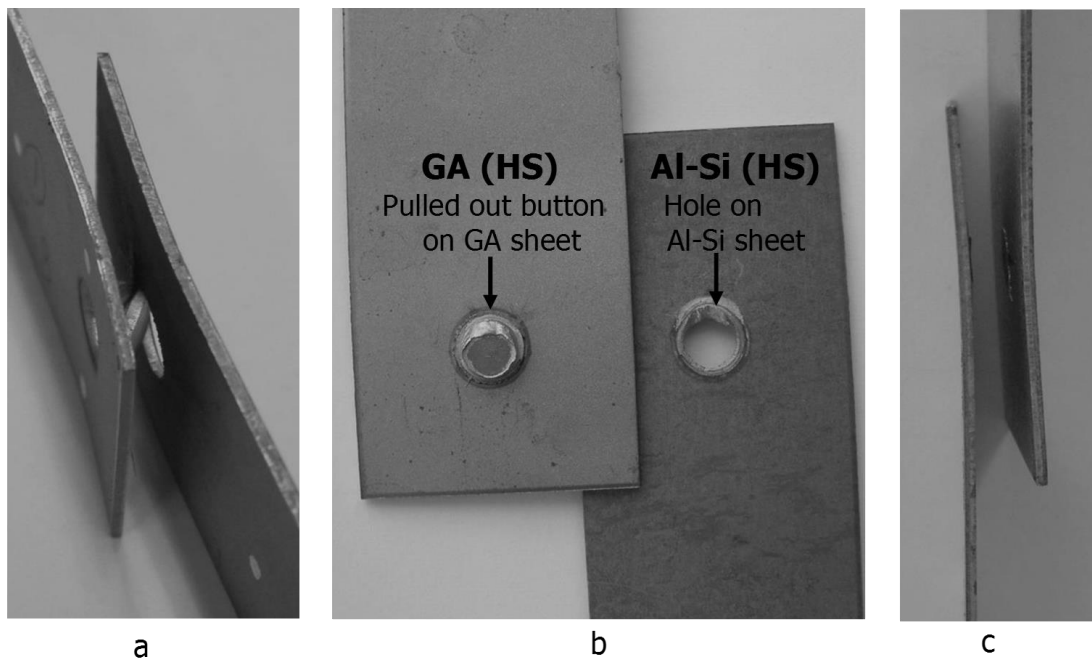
Tensile-shear failure modes of hot-stamped specimens: (a) pull-out mode with button pull-out from both sheets, (b) pull-out mode with button attached to the GA sheet while a hole is left on the AlSi sheet in AlSi/GA (HS) dissimilar welds, and (c) interfacial mode.
